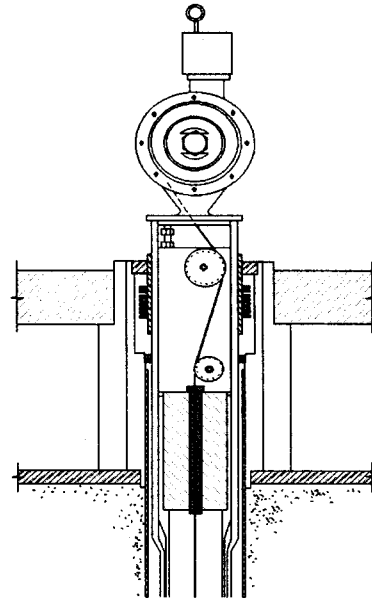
Adjuster Unit Penetration Shielding Arrangement
